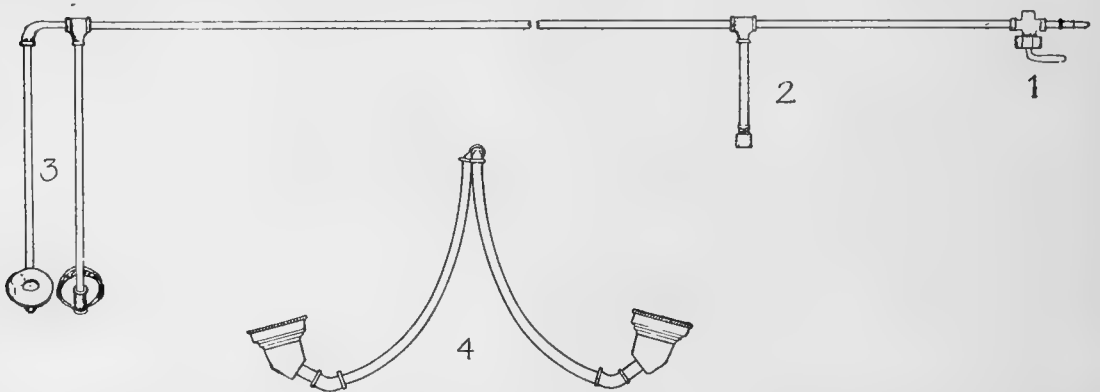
Details of sprayer shown in figure 13: 1, Hose connection; 2, handle to assist in holding and directing rod; 3, adjustable booms and nozzles, side view; 4, same, front view.
